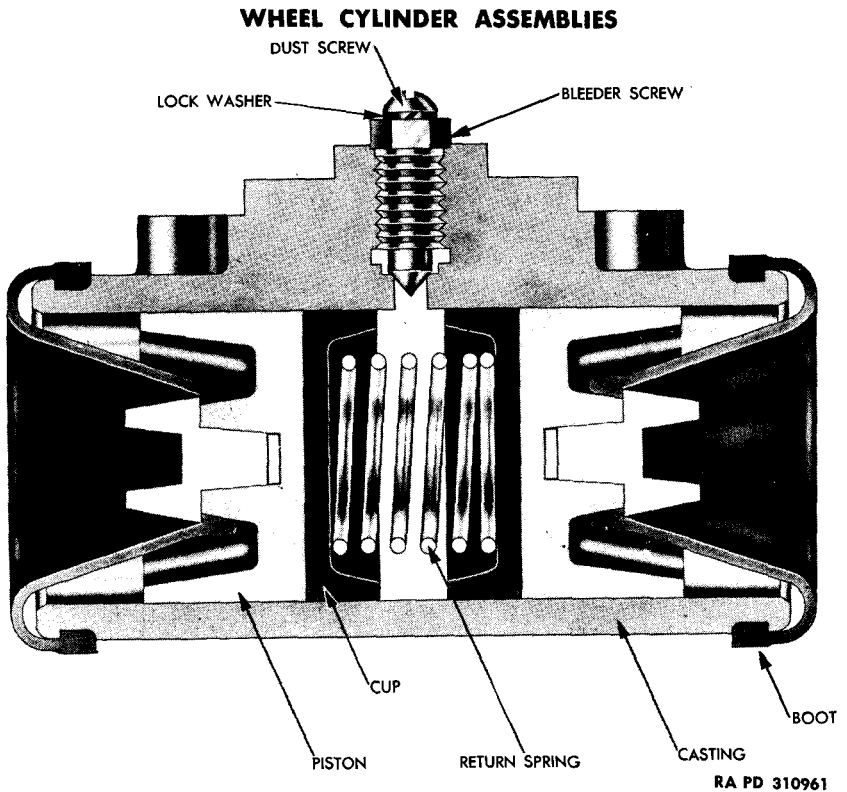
Straight-bore Wheel Cylinder with Slotted-insert Type Piston
